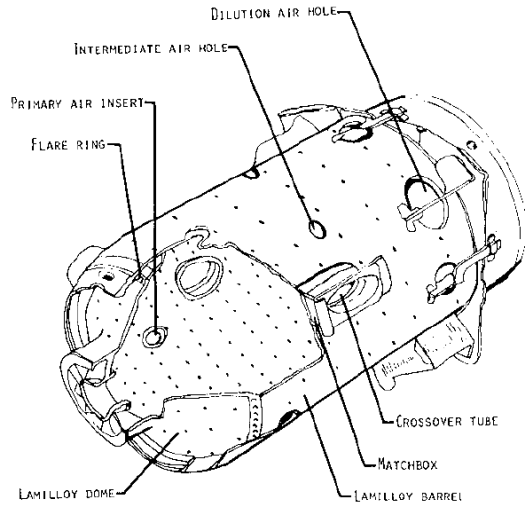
TF41 Lamilloy[®] Combustor[7]
